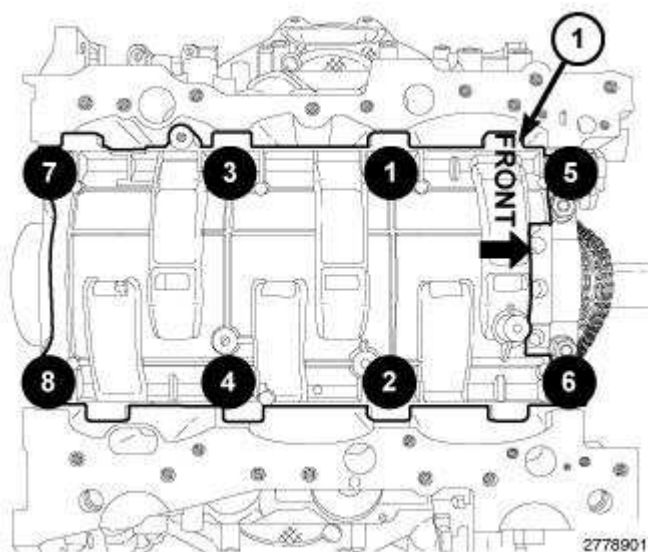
Windage Tray With Main Bearing Cap Bolts Installation Sequence
